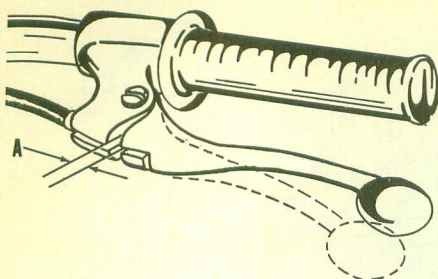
The clutch hand lever should have 2-3MM free play at (A).
